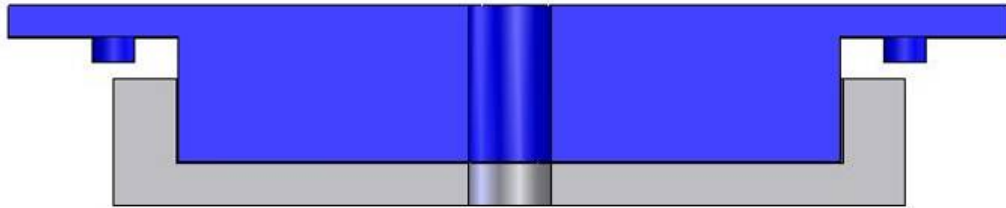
Cross Section A-A of Center Bowl/Center Plate Assembly
